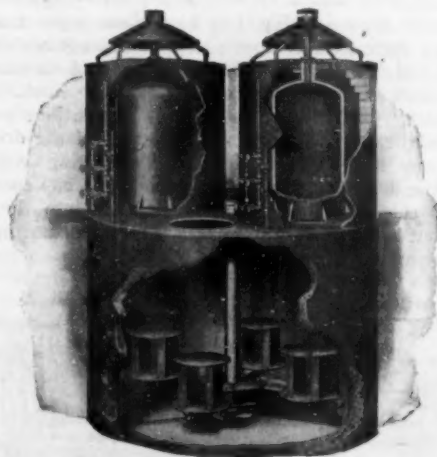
SECTIONAL VIEW OF KENWORTHY NON-OXIDIZING FURNACE
